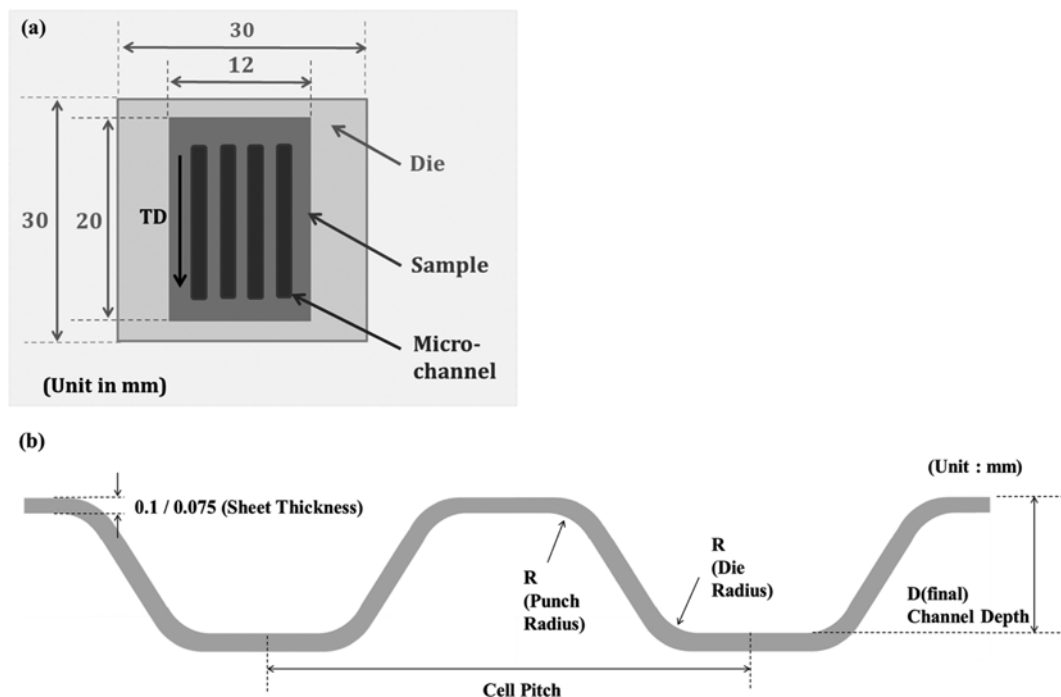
(a) Sample dimension for two-stage forming and (b) micro-channel dimension.
